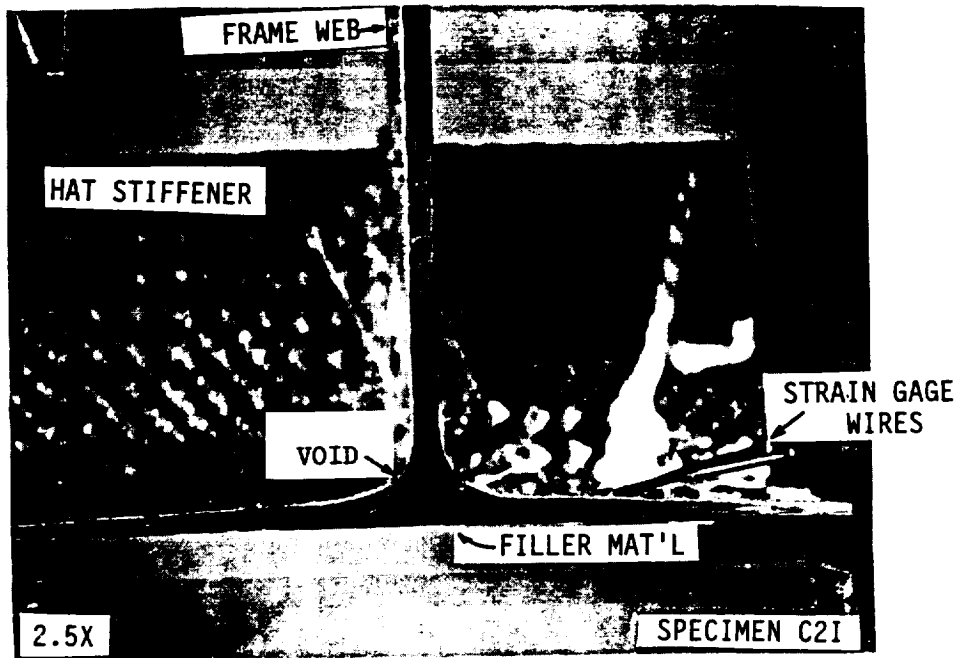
FRAME AND STIFFENER CROSS-SECTIONS NEAR FRAME STIFFENER INTERSECTION CORNERS (FULL-SCALE SPECIMEN)
